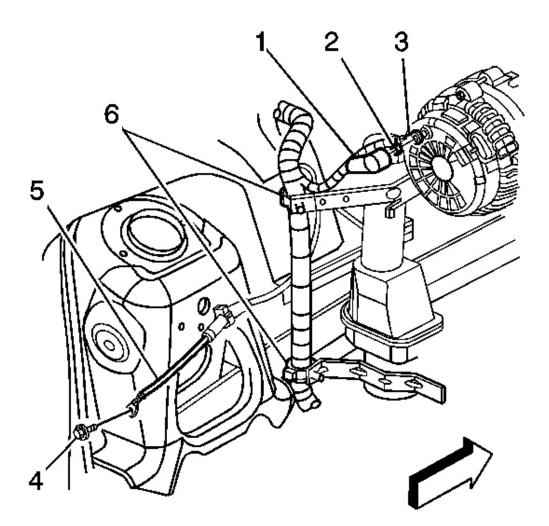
View Of Generator & Bolts (5.3L) Courtesy of GENERAL MOTORS CORP.
